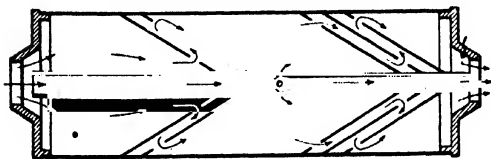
Method of Silencing Exhaust by Passing Gases through Holes in Sheet-Metal Cones Inside Muffler
